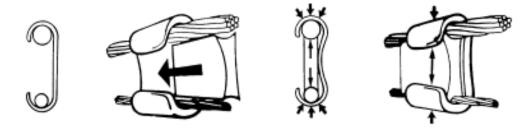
Process of mating two wire conductors through a wedge type connector [8]
